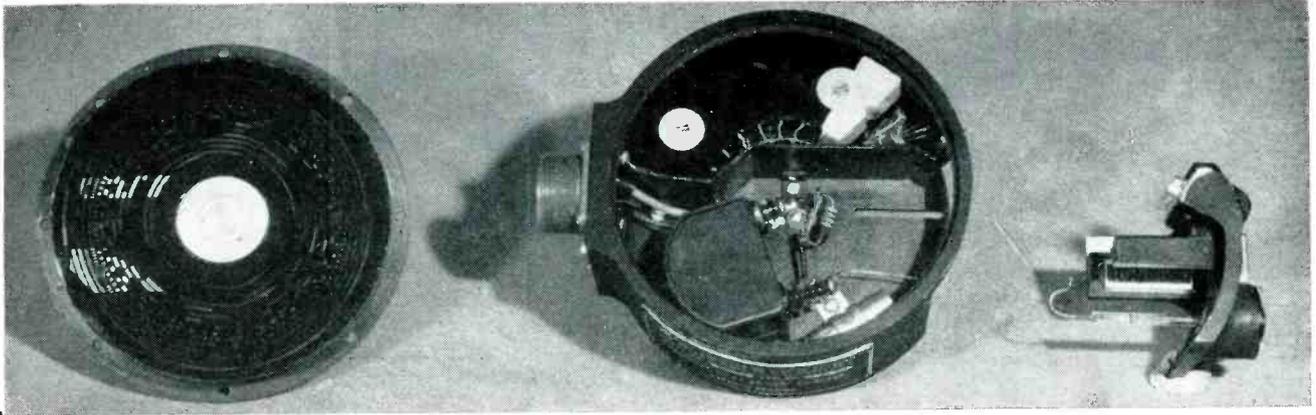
Electrical housing (center) contains code-plate and bearing assembly (left) and ribbon-filament lamp and photocell assembly
